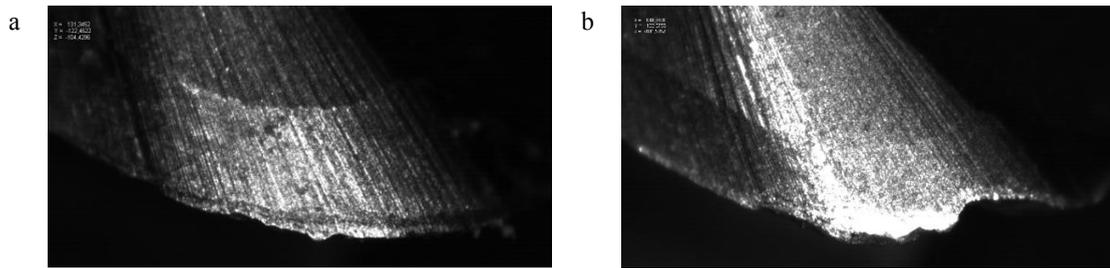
(a) Cutting tool after Inconel 718 conventional machining (b) Cutting tool after Inconel 738 LC conventional machining.
